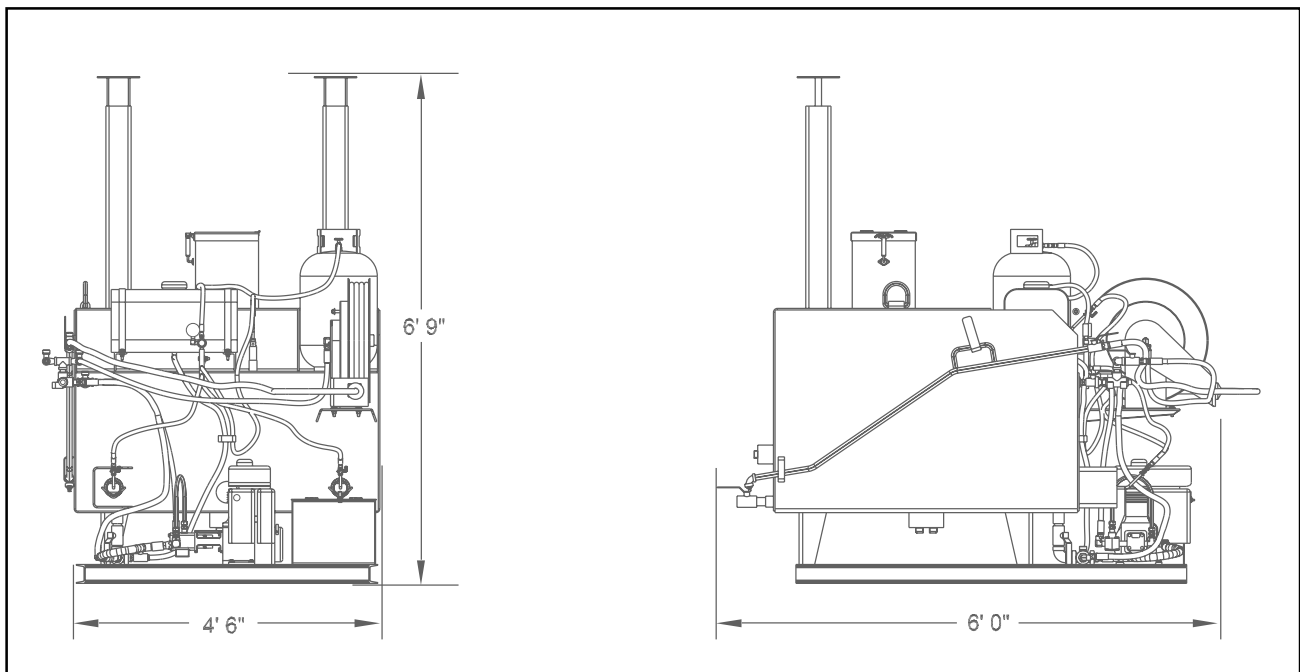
OUTLINE DIMENSIONAL DRAWING - L250S
